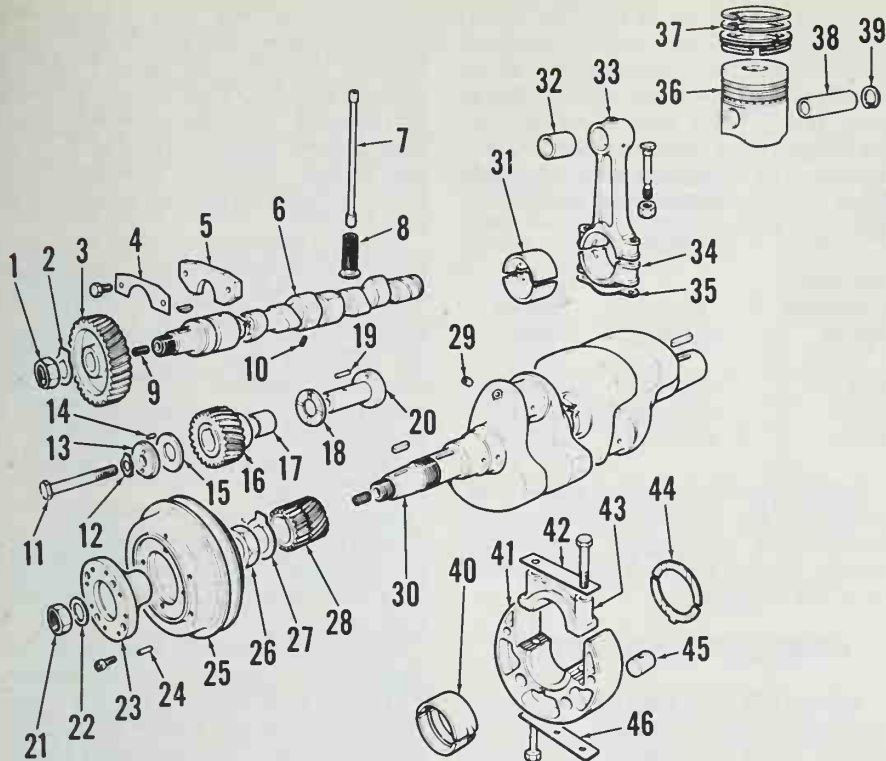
Exploded view of crankshaft, camshaft and idler assemblies.
